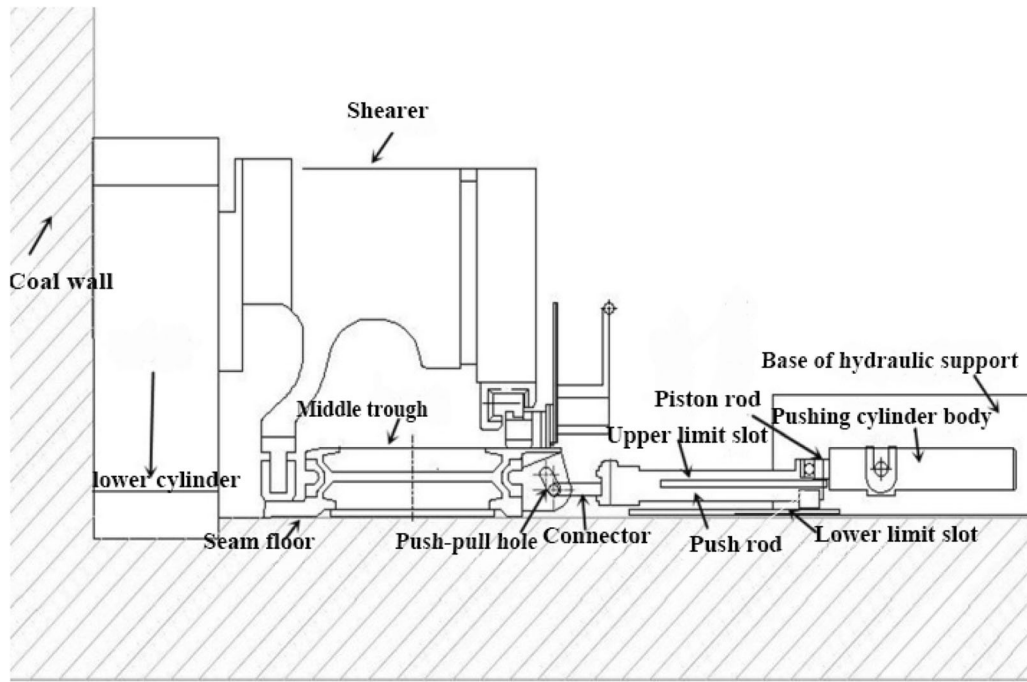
Connection between hydraulic support pushing mechanism and scraper conveyor
